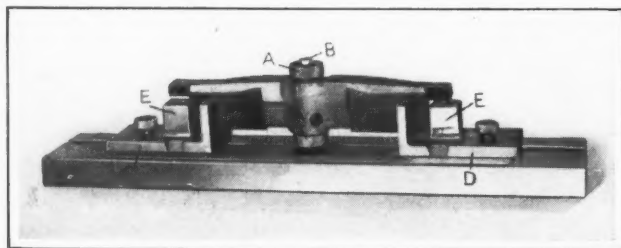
Inspection Fixture for Checking Drilling, Profiling, and Milling Operations
